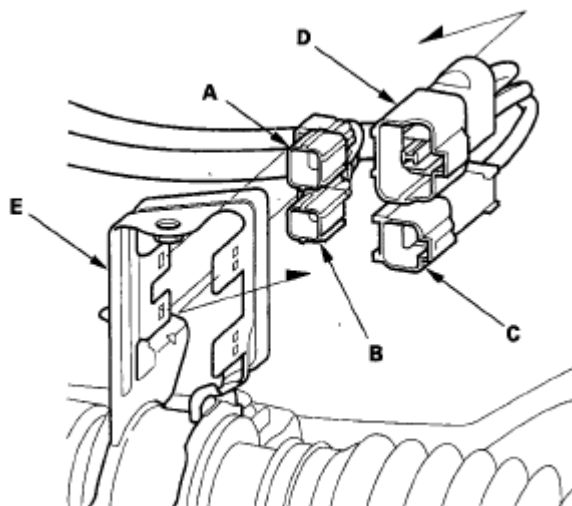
Identifying Torque Sensor 4P Connector Motor Angle Sensor 6P Connector
